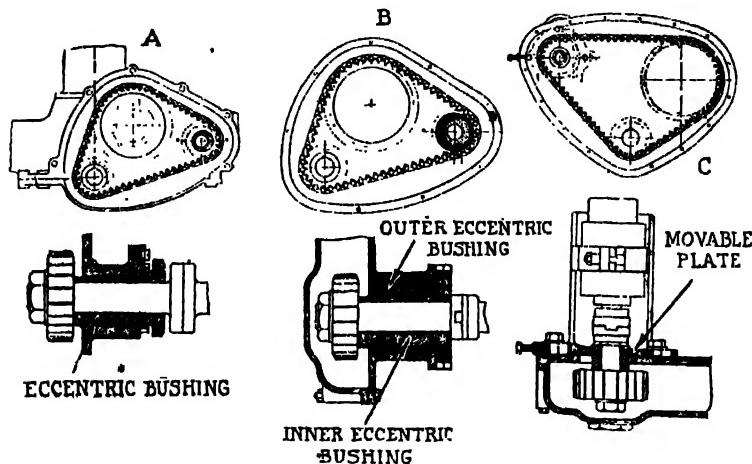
How Silent Chains may be Adjusted for Wear.
